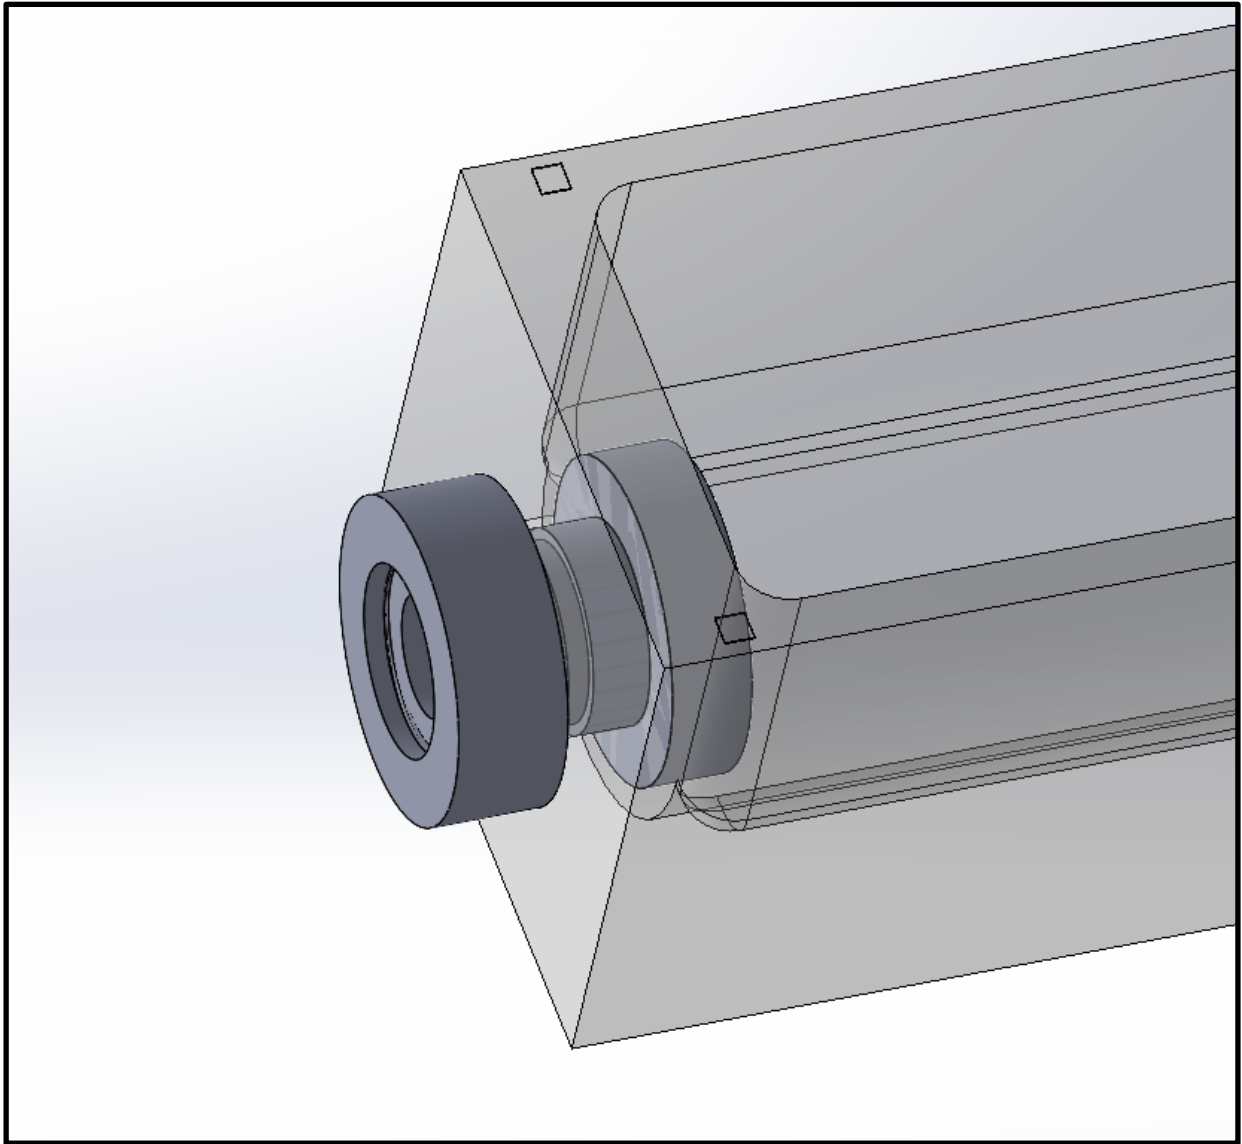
The assembly inlet fully assembled with the chamber.
